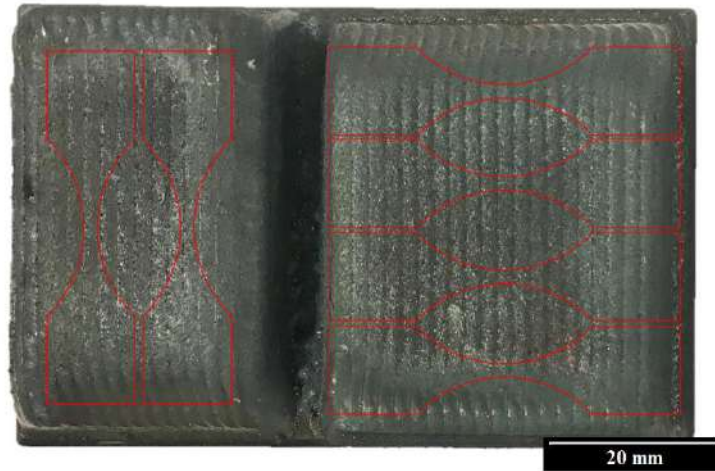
Laser cladded volumes with marked specimens for tensile testing.
